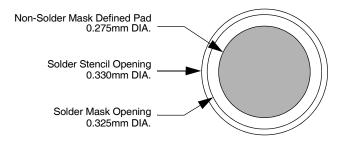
Recommended Non-Solder Mask Defined Pad Illustration
